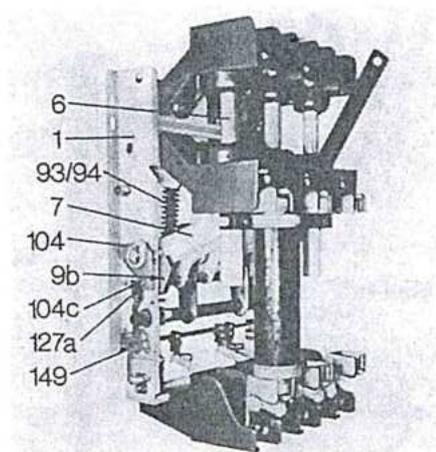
A: Type CS3 switch-disconnector with fuses (centre and righthand fuses omitted) in ON-position. Closing springs discharged, switch ready for tripping.
